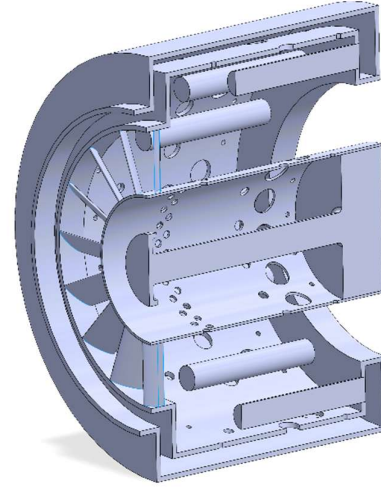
CAD geometry of the 16-blade swirler with combustor (cross-sectional view).
